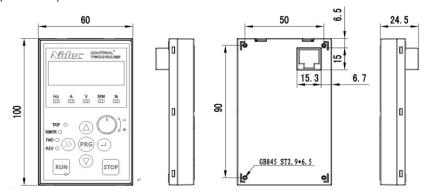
LED Operating Panel Outline and Mounting Dimension
